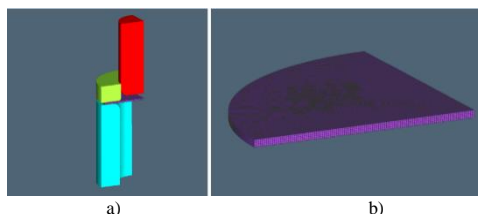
a) CAD model of deep-drawing tool, b) mesh for the blank.
